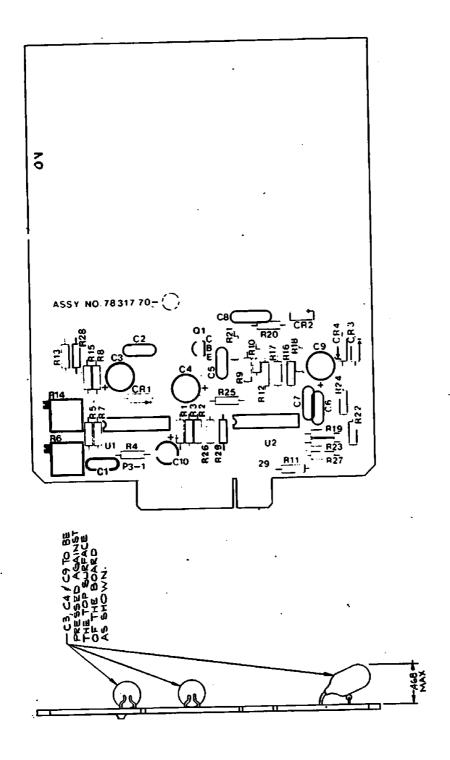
CONTROLLER CONTROL BOARD PCB3, PARTS LOCATION DIAGRAM
